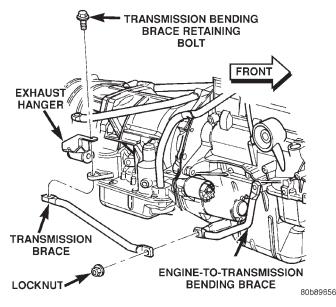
Transmission Bending Braces and Exhaust Hanger
